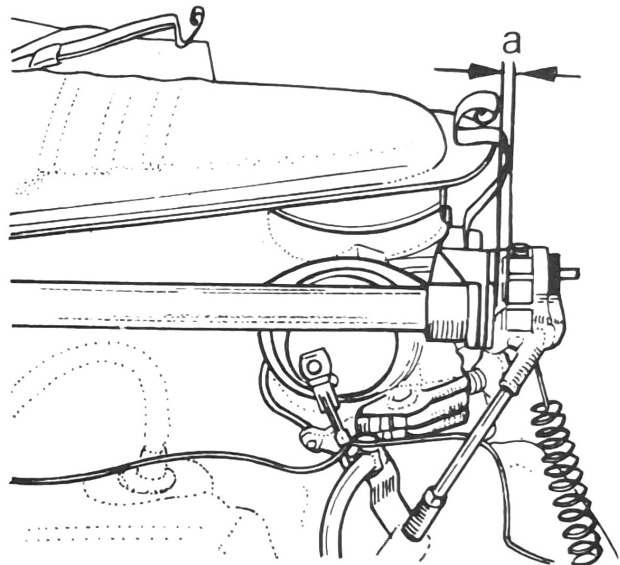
11 Setting the clearance 'a' for the throttle linkage
